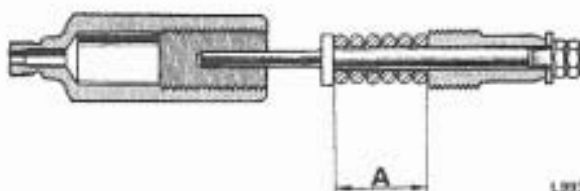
CHECKING THE FRONT BAND ADJUSTING TOOL
